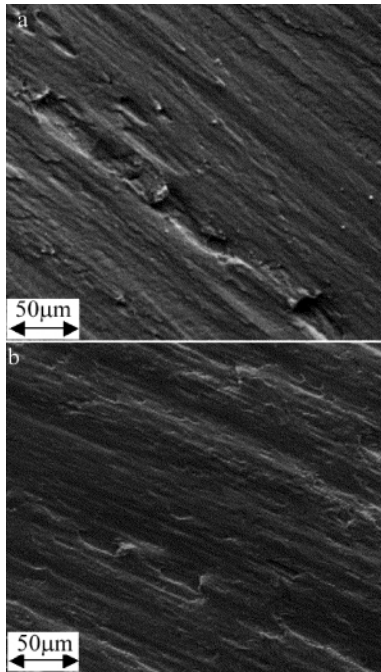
Comparison of machined surface of traditional cutting and laser-assisted cutting
